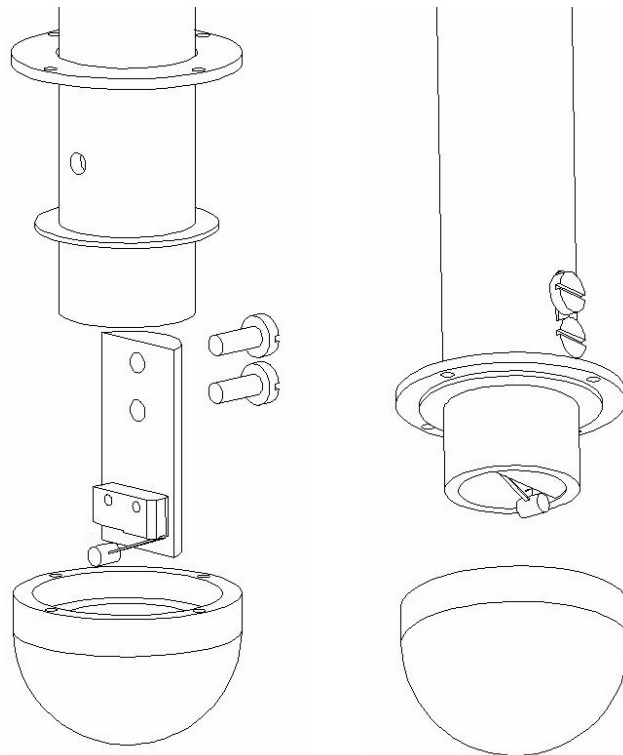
Two exploded views of the solid model of the foot subassembly.
